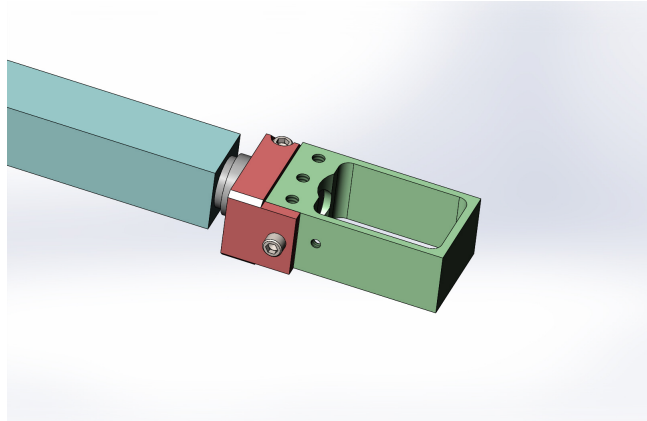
Solid Works rendering of attachment to reliably hold probe onto y-motion assembly.
